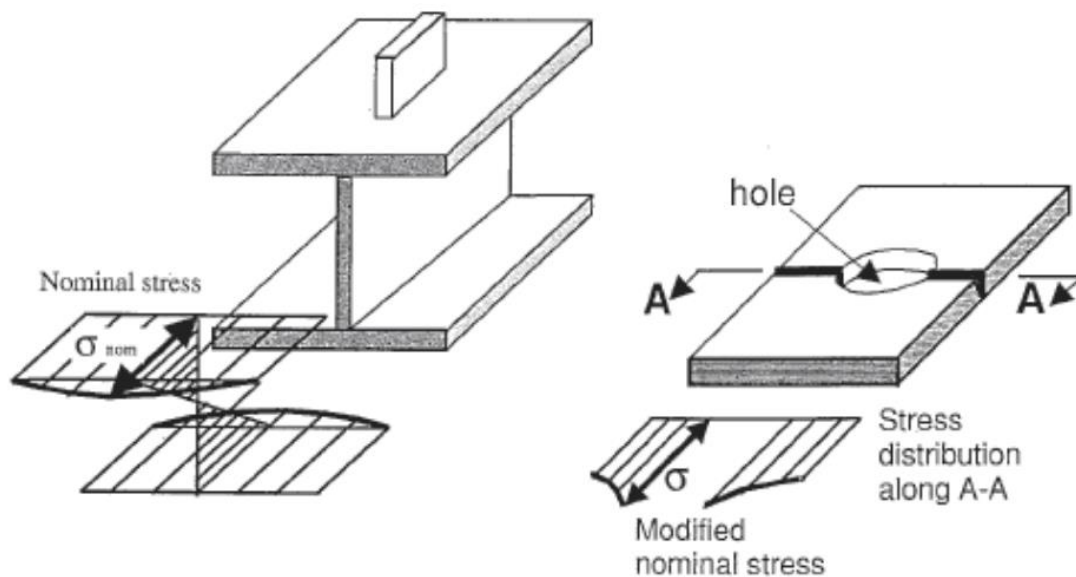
(a) Nominal stress distribution in an I-beam with flange attachment; (b) Modified nominal stress in a detail combining butt weld and hole. (Liao, 2011)
